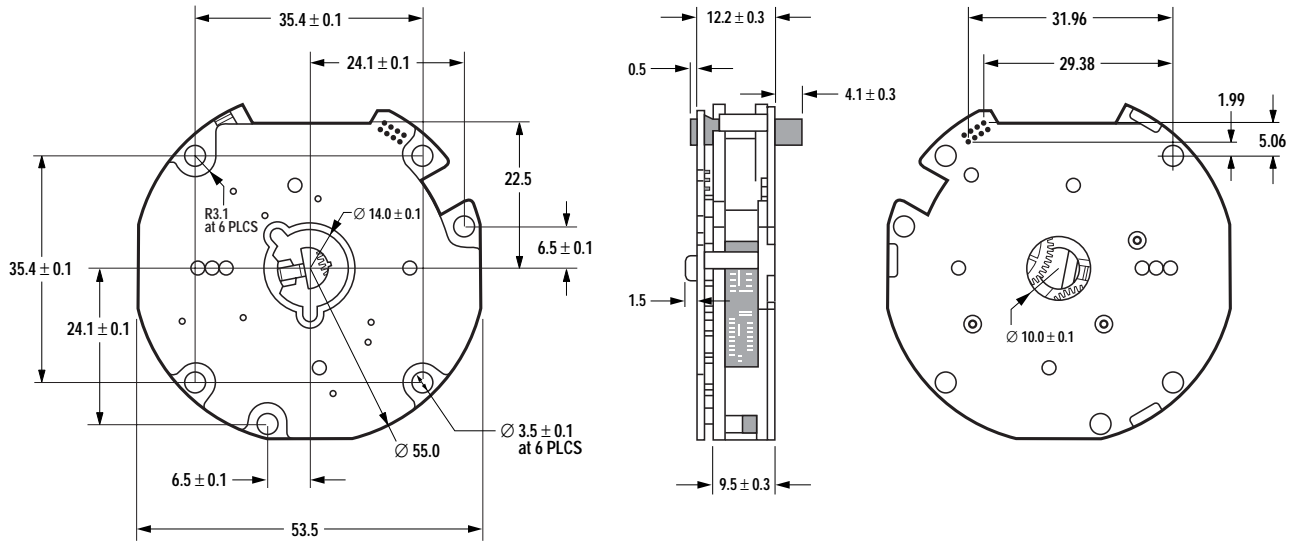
Package dimensions of multiturn absolute module – AEAT-84AD.
